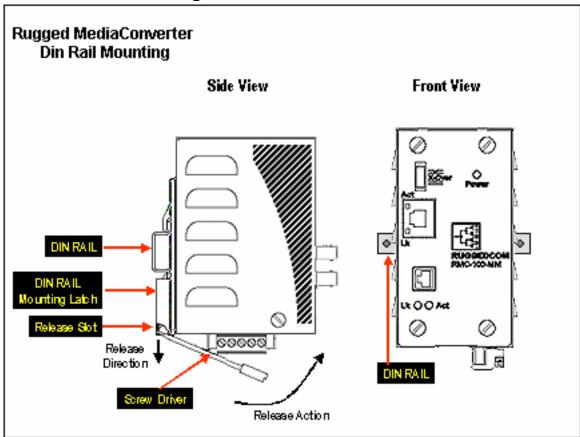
RuggedMC™ DIN Rail Mounting
